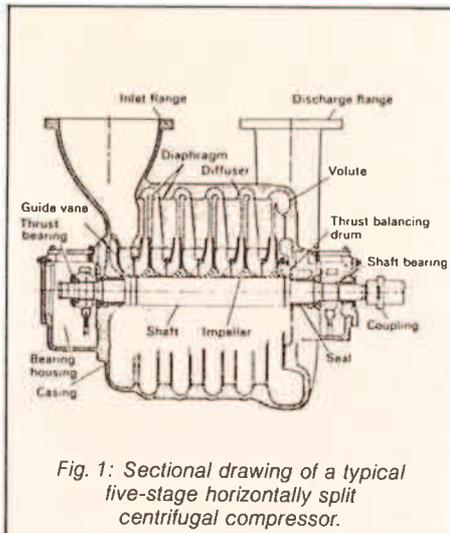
Sectional drawing of a typical live-stage horizontally split centrifugal compressor.
